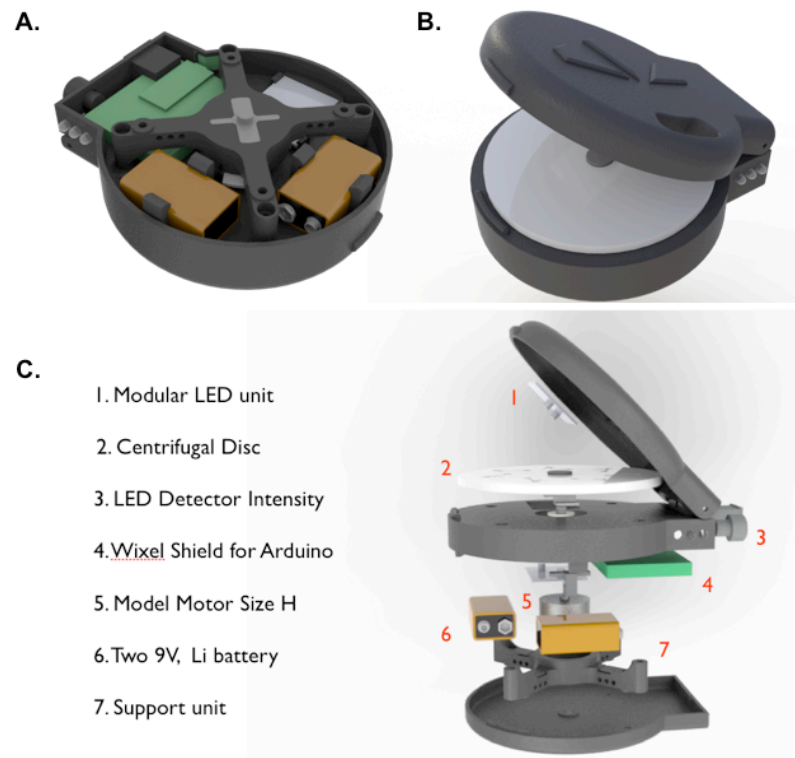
a) Bottom side view of CMAS with the components in place, b) CMAS with loaded CD and c) exploded view of CMAS and components.
